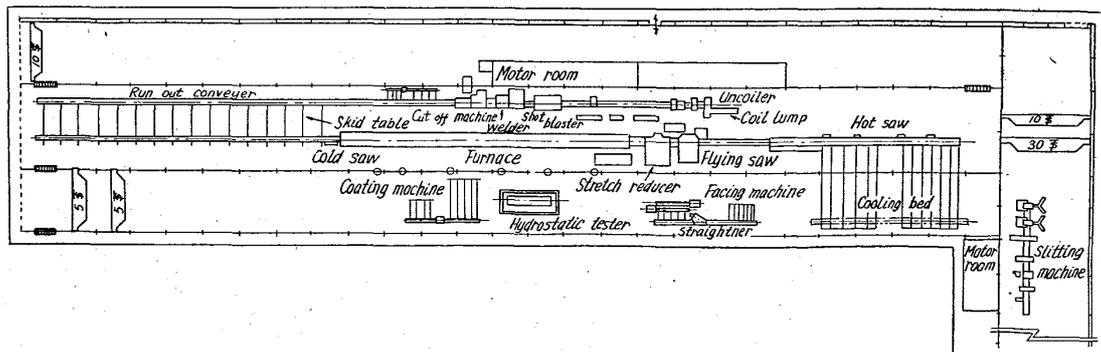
Layout of the pipe mill for hot finishing of electric resistance welded pipe.
